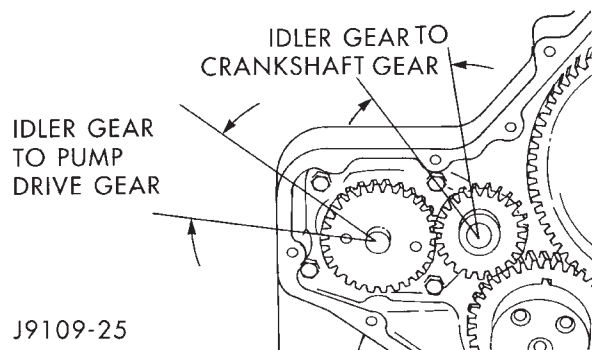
Idler Gear to Pump Drive Gear and Crankshaft Gear Backlash
